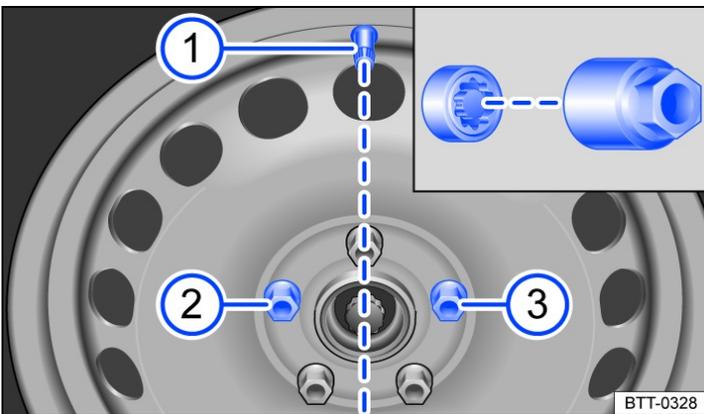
Changing a wheel: tyre valve ① and locations of the anti-theft wheel bolt ② or ③.
